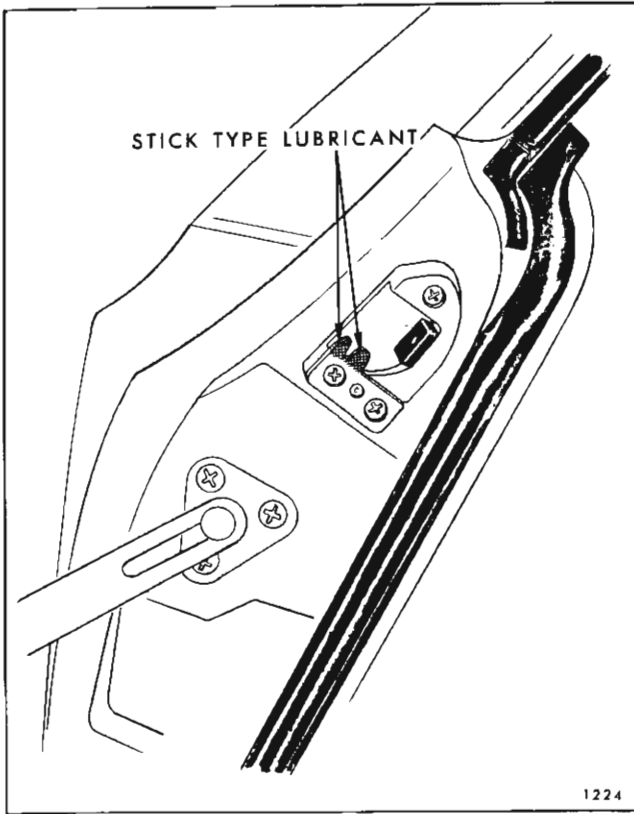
B10—Tail Gate Lock Striker "15", "35" & "45" Styles
